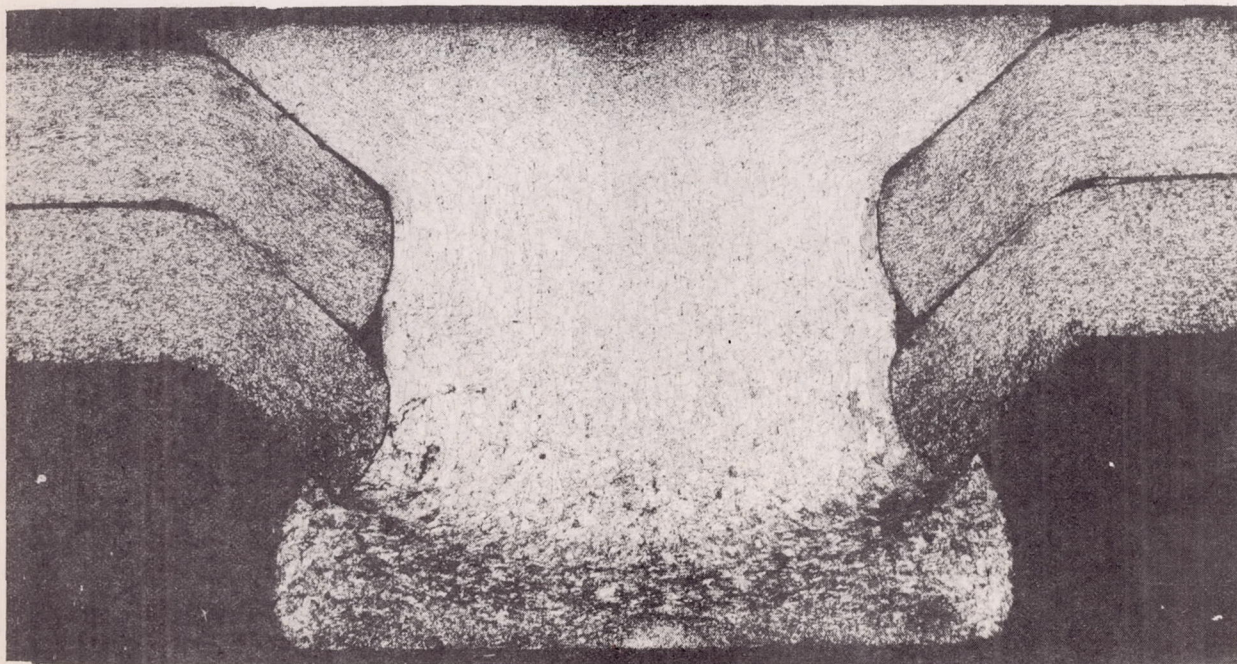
Set of dimples produced with 5000-pound pressure in 0.040-inch 24S-T sheet drilled with an 0.1130-inch diameter No. 33 drill. Magnified 20 times.
